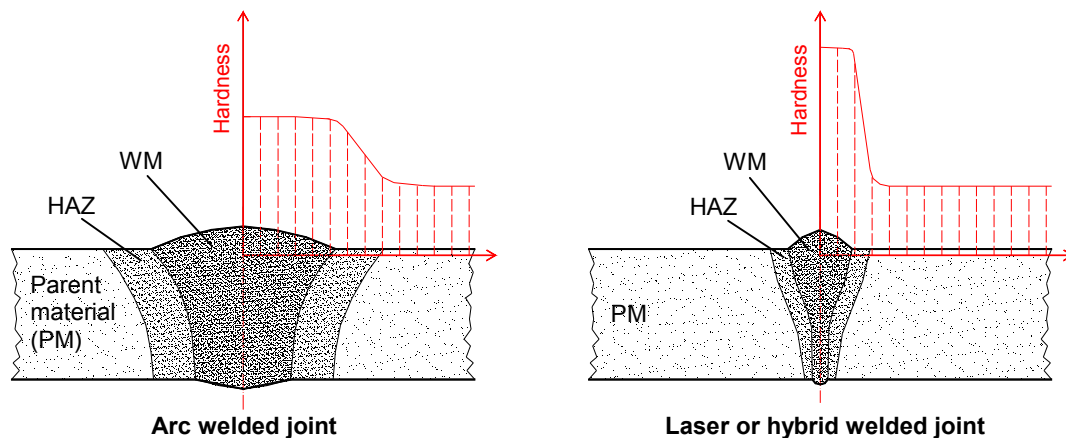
Material zones of joints welded respectively by arc and laser methods: parent material (PM) with weld materials consisting of heat-affected zone (HAZ) and weld metal (WM).
